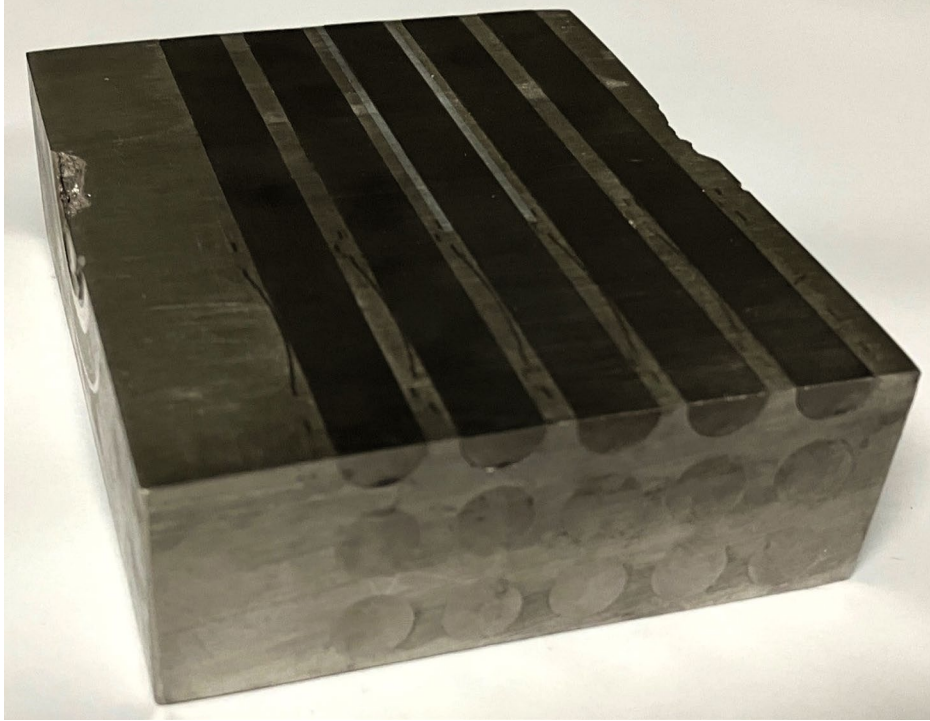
Image of a Sn-Bi casting and stainless steel rods cross-sectioned in the vertical and horizontal directions through the rod spacer grid region.
